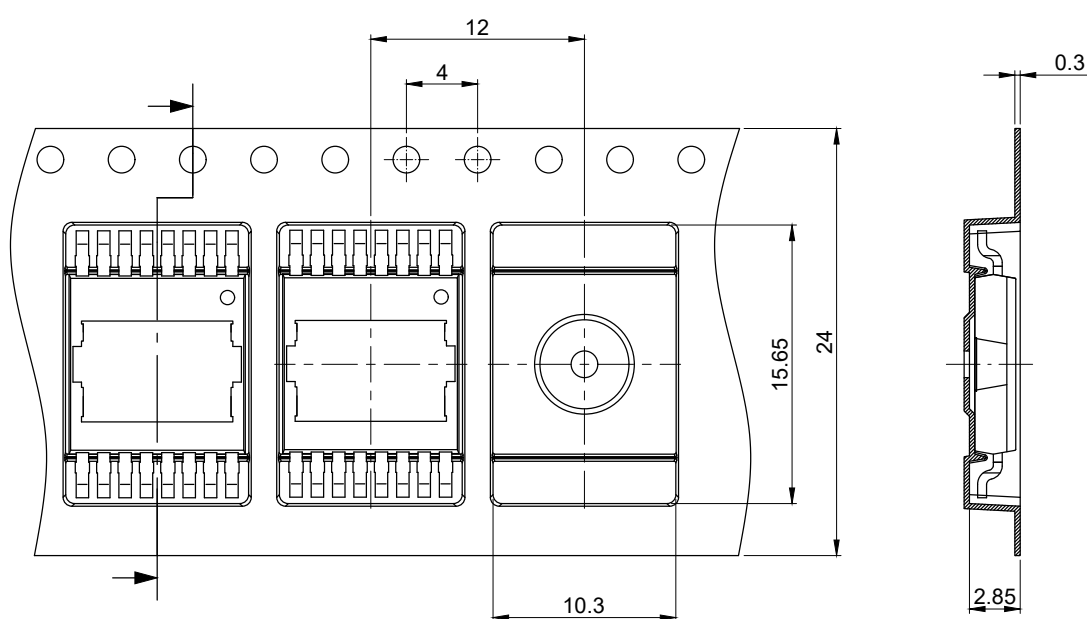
Outline PG-HDSOP-16, dimensions in mm
